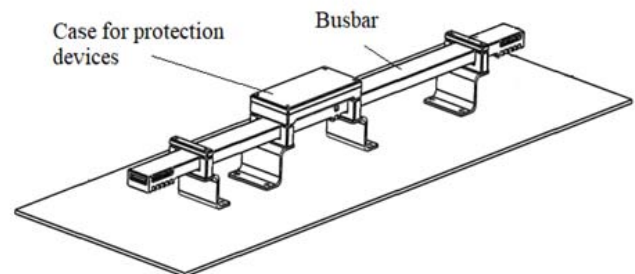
Isometric view of the busbar installed on a panel (without wire bends).
